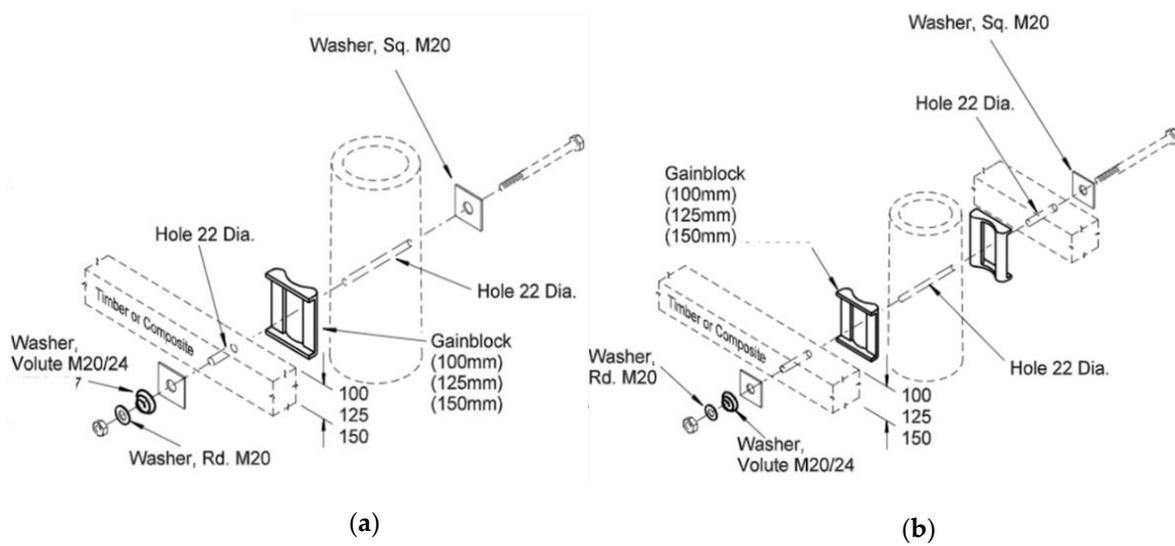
Predrilled crossarm assembly: (a) single crossarm; (b) double crossarm [31].
